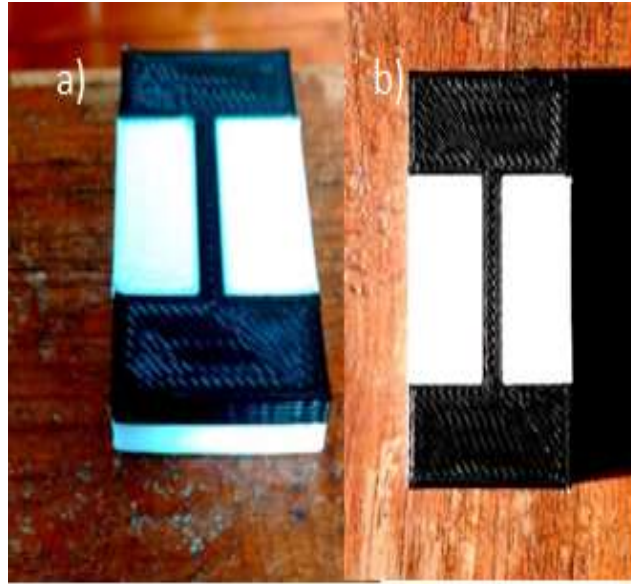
A) Side View of Assembled Part, B) Top View of Assembled Part
